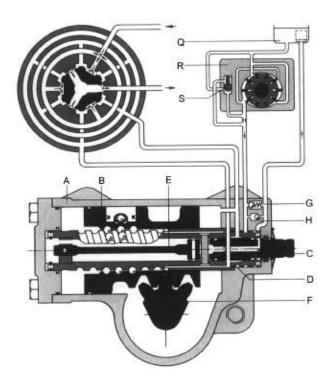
Working principle diagram of the ZF8095 and ZF8098 steering gear (in case of straight-line running) A-Steering gear housing B-Piston C-Rotating valve core of the input shaft D-Worm valve bush E-Torsion barF-Sector gear shaft H-Oil supplementary valve Q-Oil storage tank R- Booster pump S-Flow control valve
